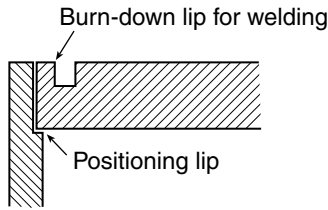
Burn-down lip machined into a circular plate to increase welded-joint reliability.
